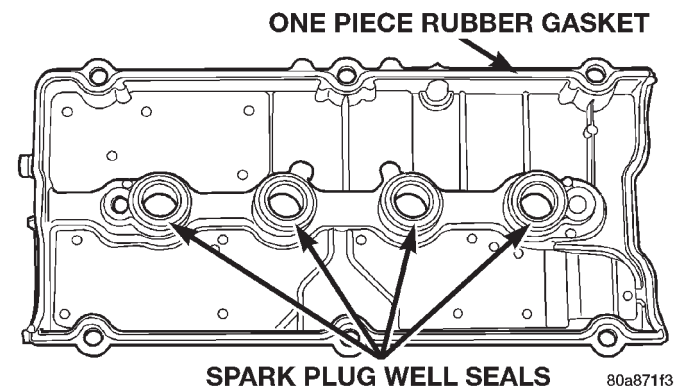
Cylinder Head Cover Gasket and Spark Plug Seals
